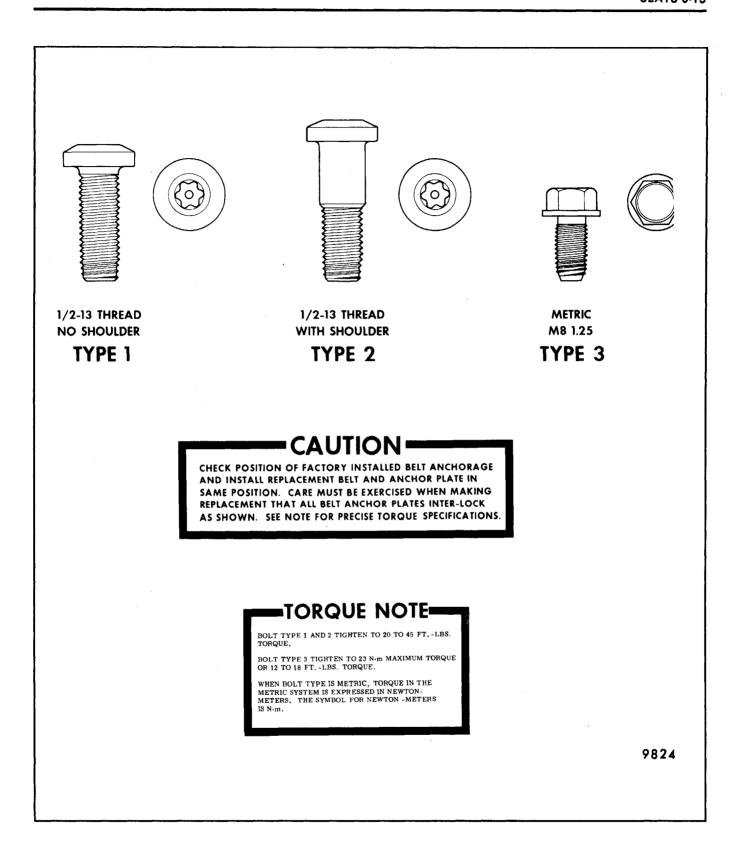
Front Seat Lap and Shoulder Belt Anchor Bolts - F, H and X Styles
